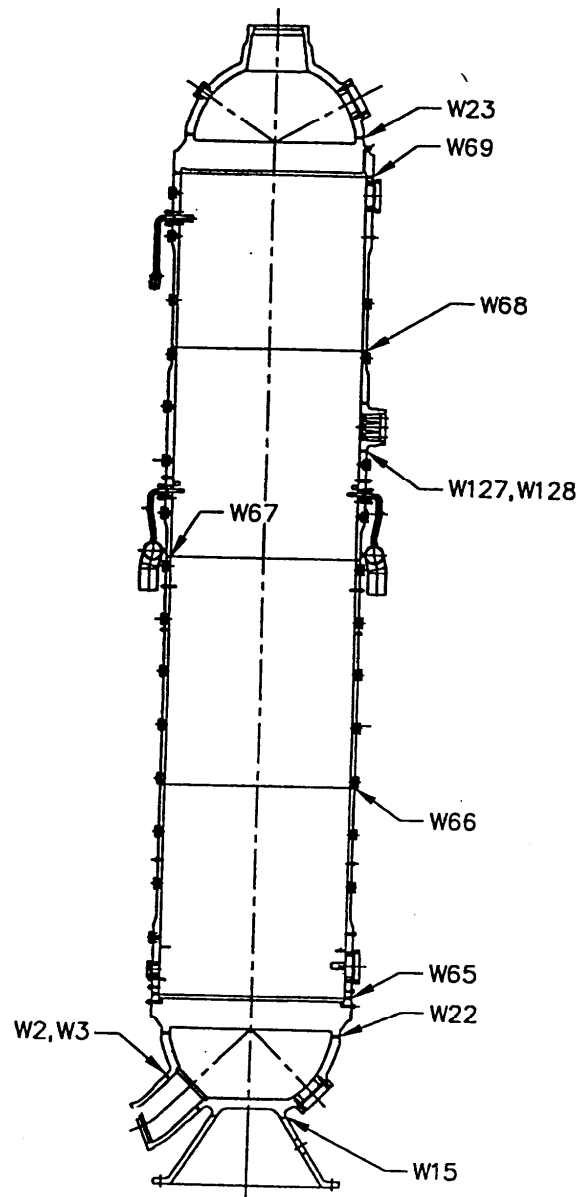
Location of Replacement Steam Generator Weld
